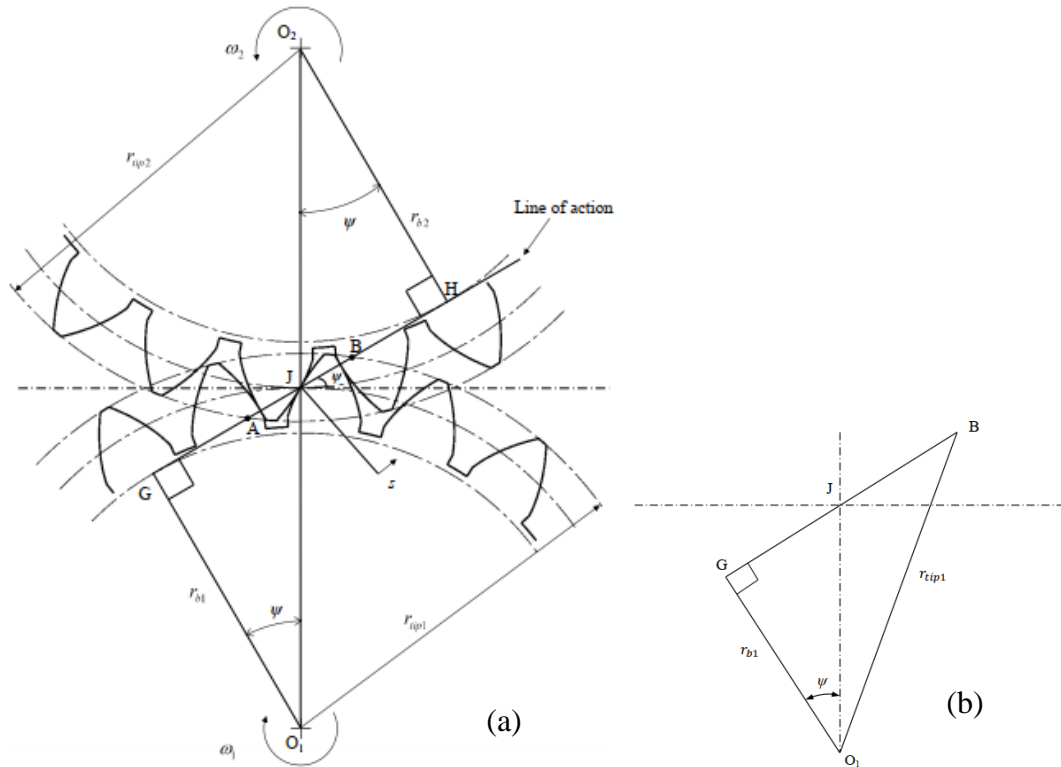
Involute gears in contact (a): schematic geometry of pinion (b) [46] [47]
